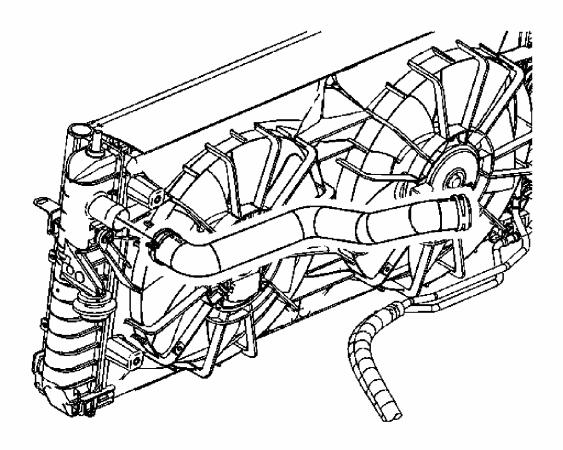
View Of Radiator Inlet Hose Courtesy of GENERAL MOTORS CORP.
